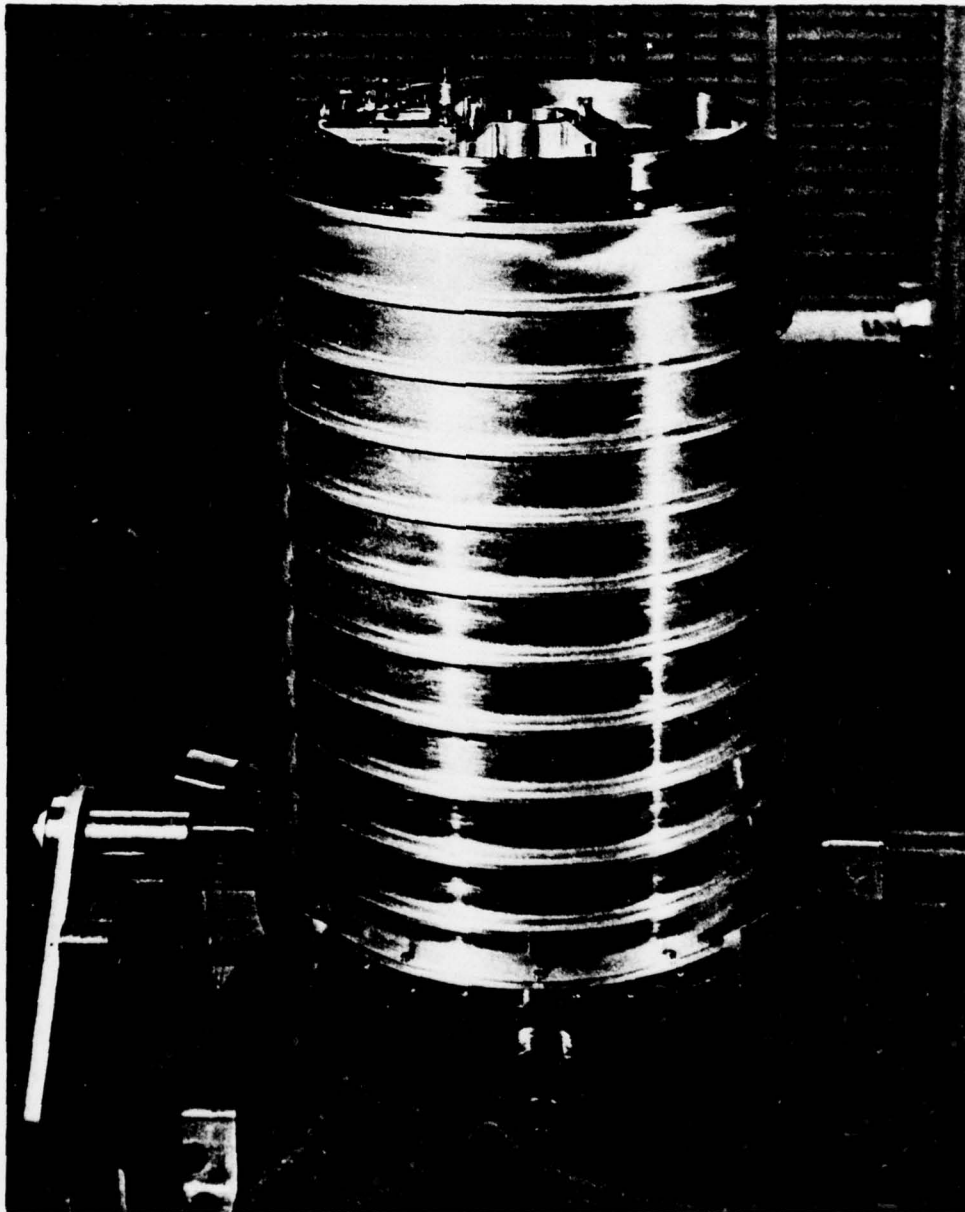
Vacuum Enclosure Cylinder and Top Plate Added to Assembly
